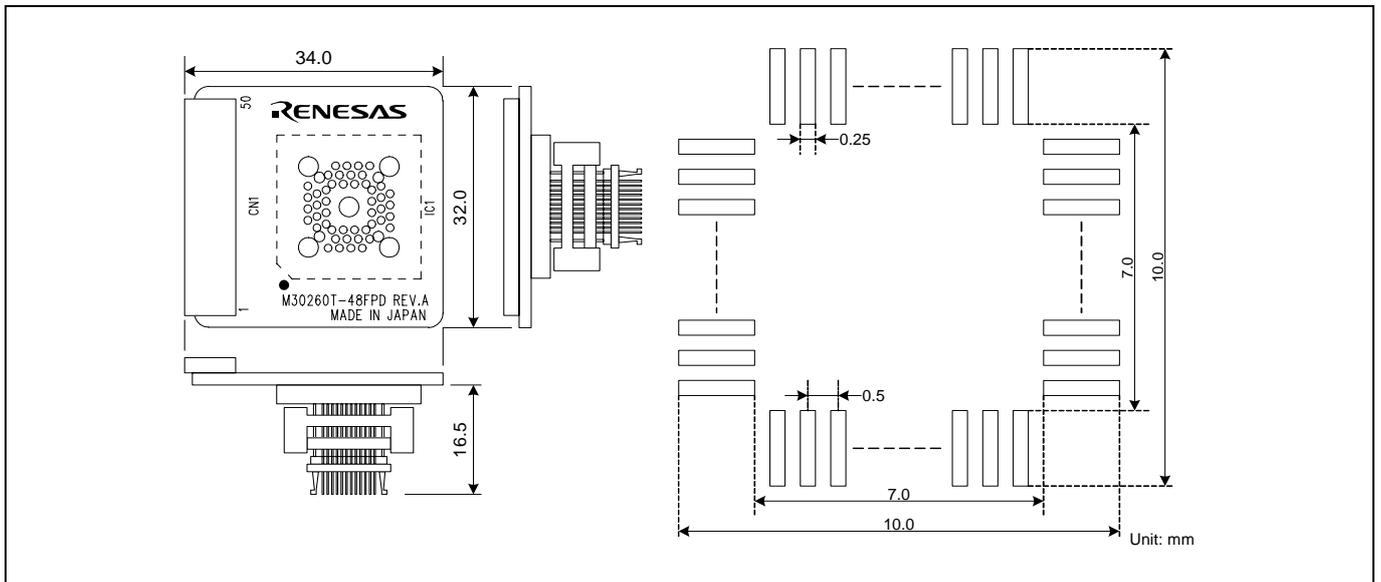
External dimensions and a sample foot pattern of the converter board M30260T-48FPD
